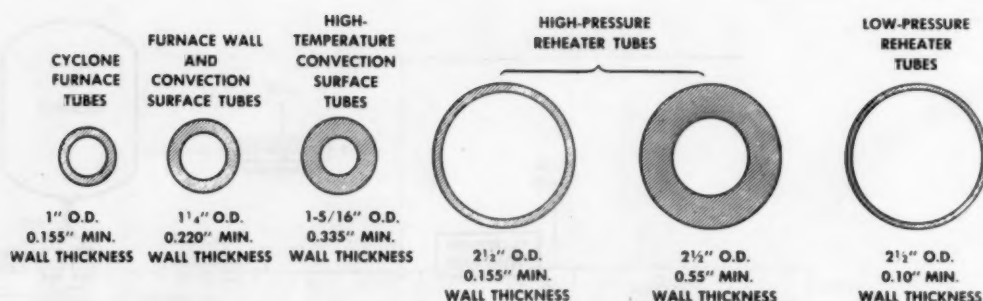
TYPICAL TUBE CROSS SECTIONS FOR B&W UNIVERSAL STEAM GENERATOR AT PHILO PLANT
